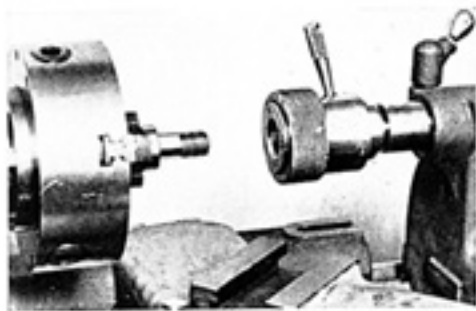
Die mounted in tailstock of lathe for threading studs.
